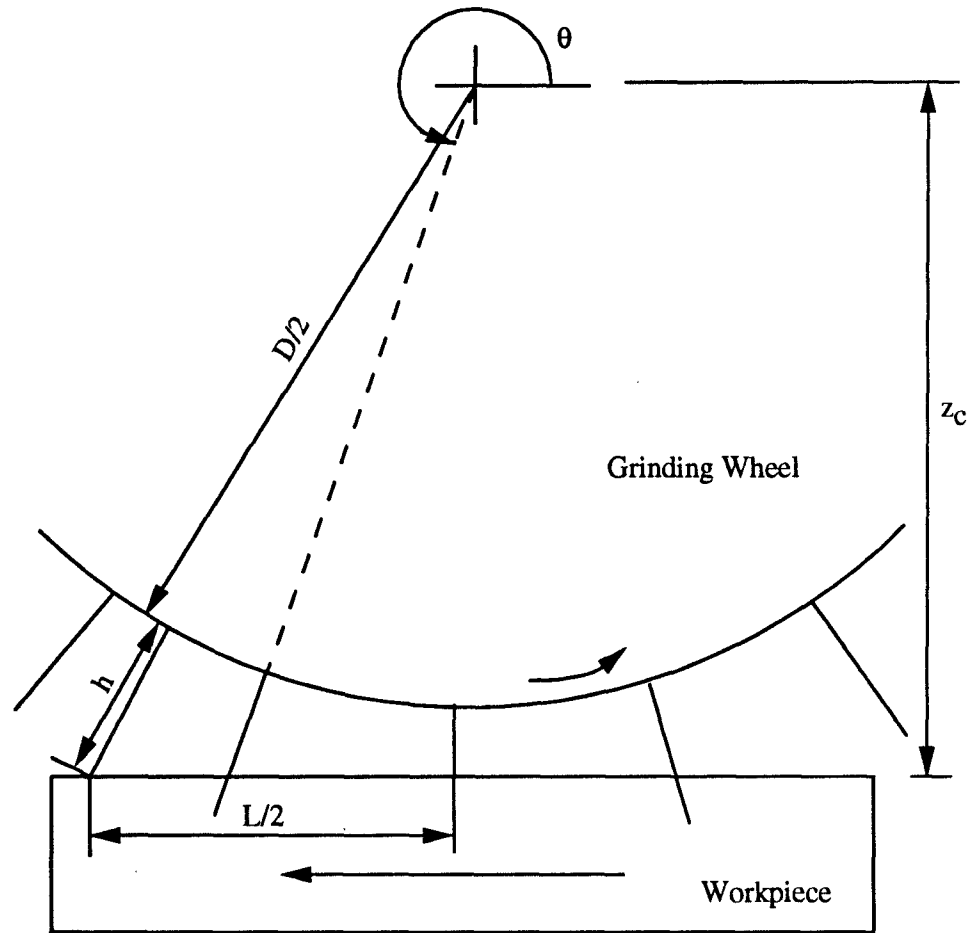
Enlarged View of the Workpiece - Grinding Wheel Contact Region
